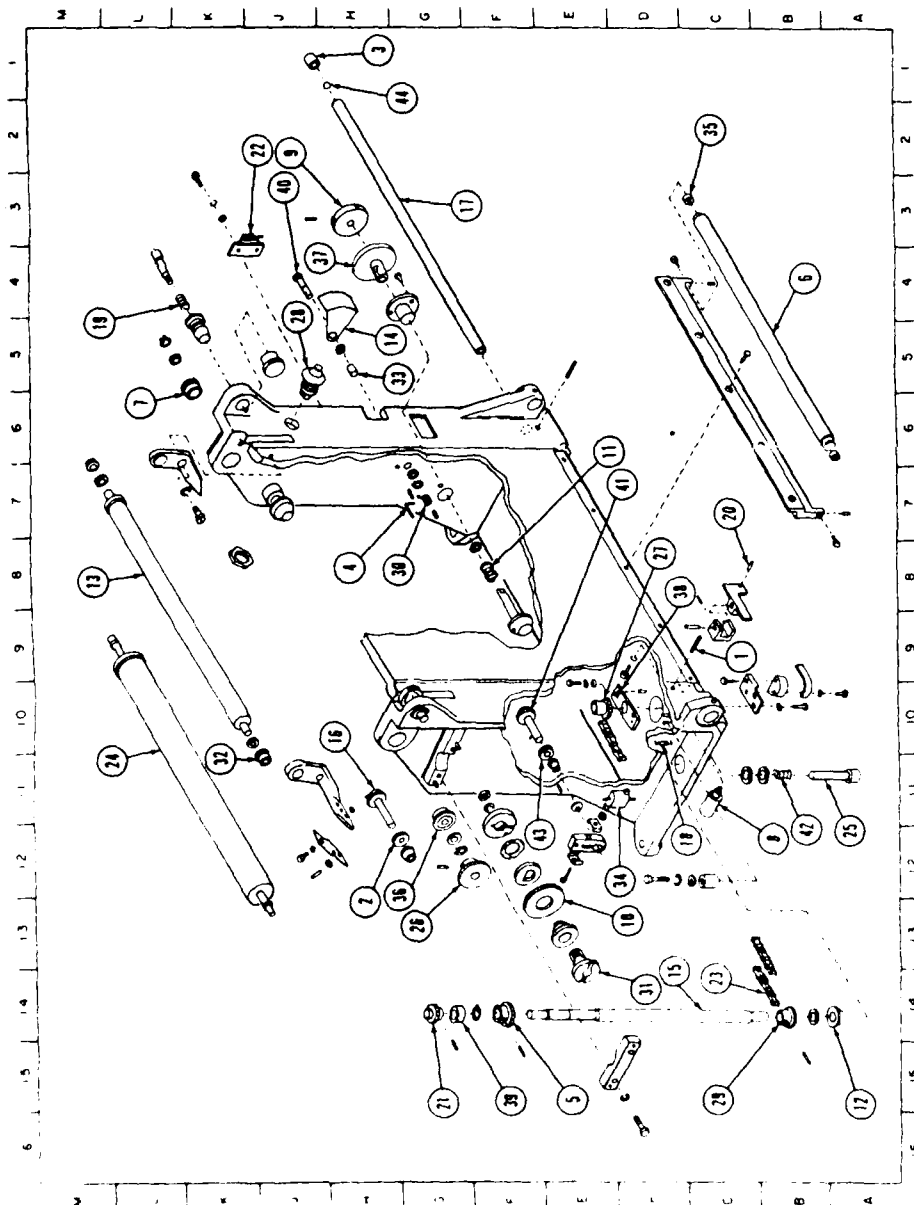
Exploded view used as stimulus in experiment, with table (44 callouts, random order, numbers circled, leaders extended)
